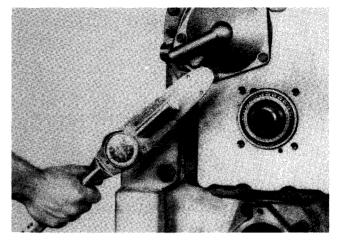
Position bearing cap over bearing and install bearing cap bolts. Tighten to specified torque. (See torque chart).
